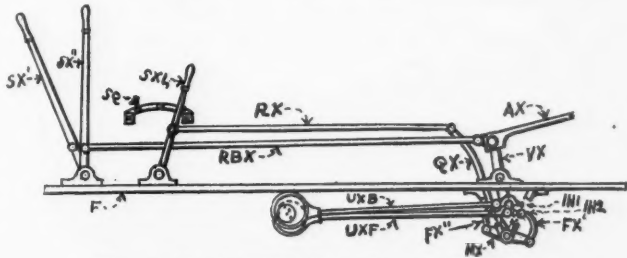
Norris' "D" Hook Gear; 1838-1850.
